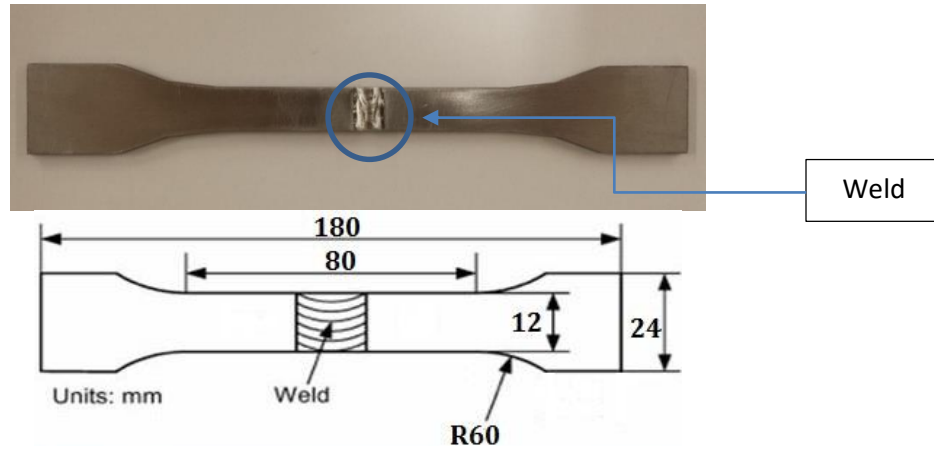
3- 1 The shape and dimensions of ASTM welded sample
